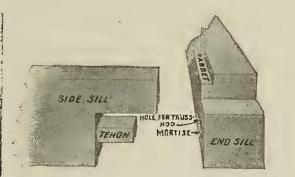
DETAILS OF LAP JOINT SIMILAR TO FIG. 600
